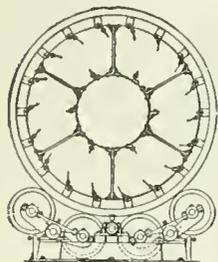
END SECTION ROTARY DRIER, SHOWING CONCENTRIC SHELLS
